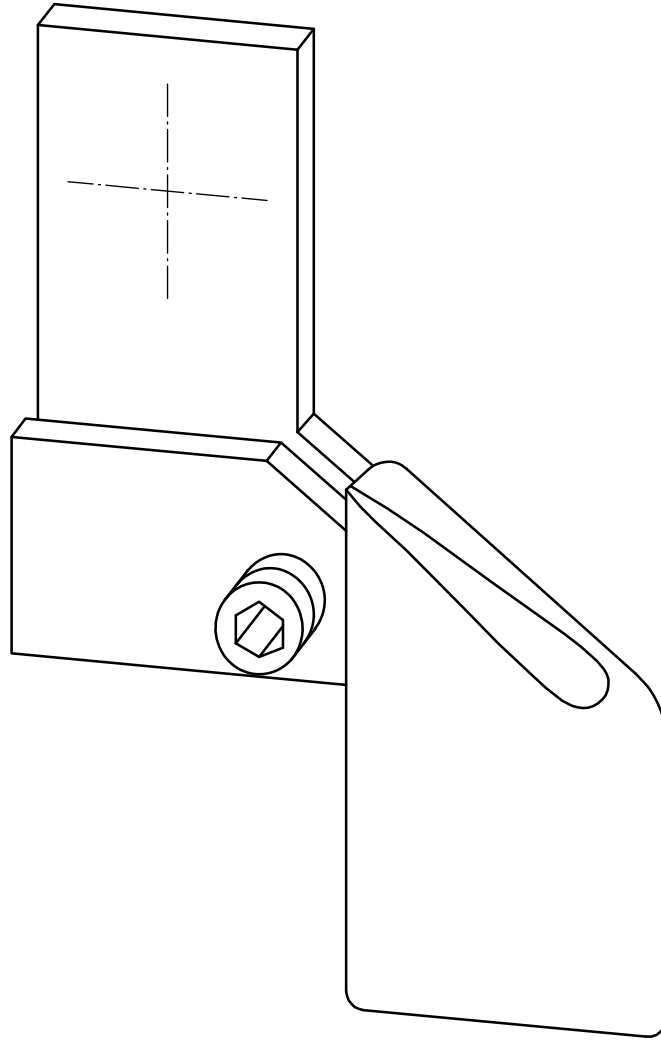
Test specimen clamped in upper clamp with the free end folded outwards over the sloping edges of the clamp
